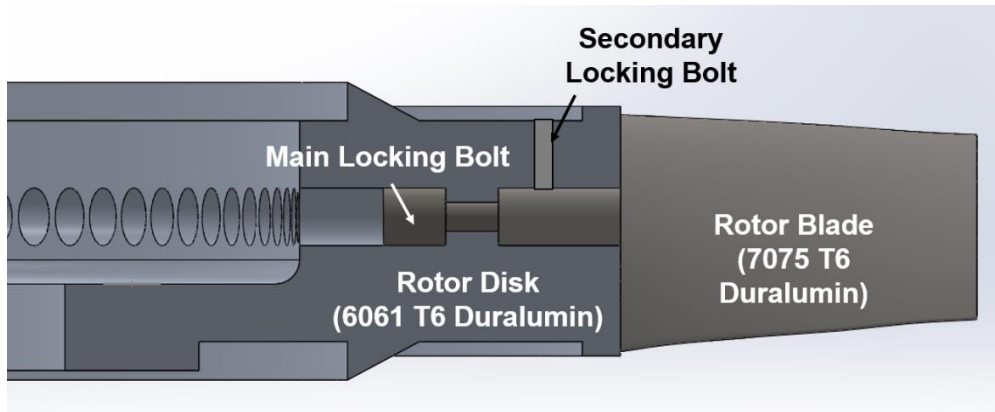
Cross-Sectional View of the Designed Rotor Disk and the Rotor Blade
